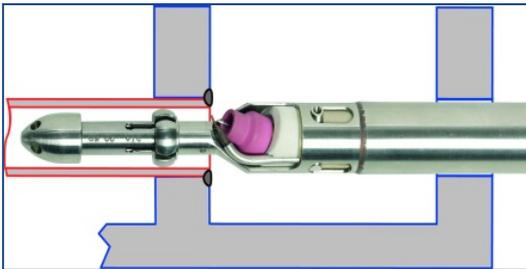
Proven weld preparations of the tubesheet for gapless welding
